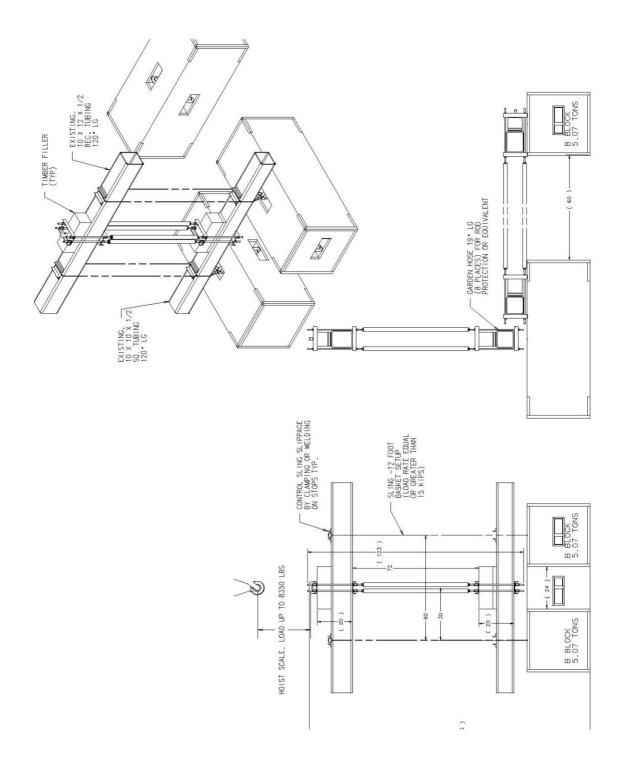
SM3 Coil Insert Lifting Fixture Load Test Setup
